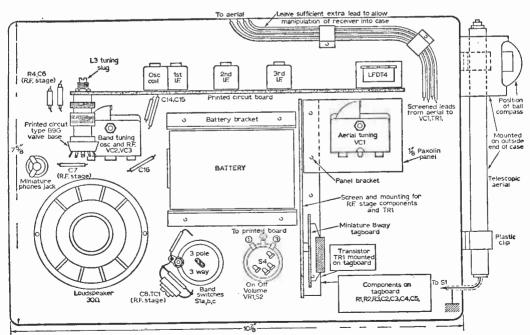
Layout inside the cabinet, viewed from the rear. Only the larger components are shown.
